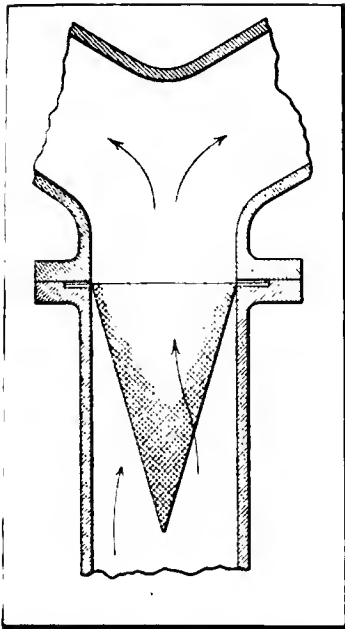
Gauze cones are sometimes inserted in the intake pipe to break up the gasoline spray
